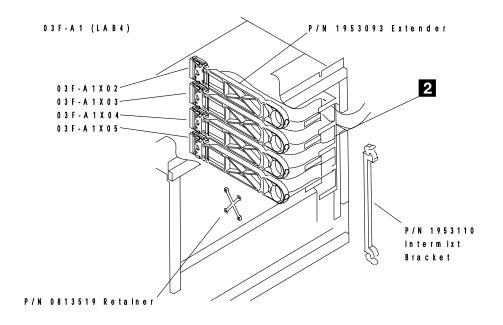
IOC Bus Cable Routing in the 3746-A12
